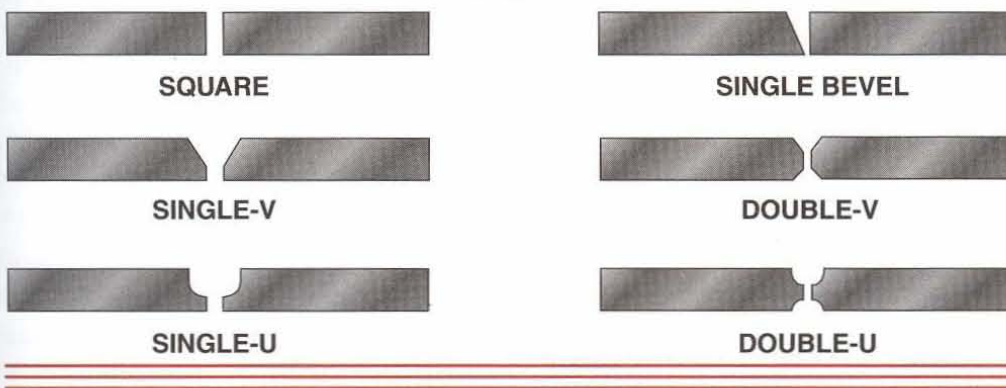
Common butt joints used for welding include the square, single bevel, single-V, double-V, single-U, and double-U.
